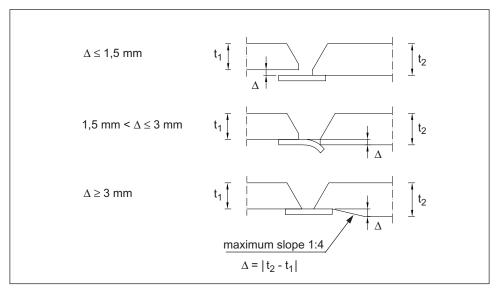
End-to-end joint using backing, when the hollow sections have different wall thickness [1]
